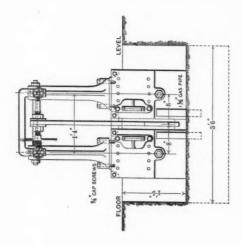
, 2 and 3 show the form and dimensions of the machine used in the experiments. Plates XXVI is from a photograph which shows somewhat imperfectly the general appearance of the apparatus. The hammer used weighed 103 lbs. The fixed knife-edges were designed so as to allow the broken bar to swing out of the way of the moving hammer, and were secured in a manner which allowed them to be adjusted for spans of 8, 12, 16, 20 and 24 ins. The heavy anvil plates behind them were bolted to a large anvil block of concrete which was sunk in the earth. Adjustable supports were provided to hold the test bar in position. The pivot blocks which support the hammer shaft are adjustable to allow for test bars of different depths. Attached to the hammer shaft is a registering device on which the swing of the hammer is read. The pivot blocks, etc., are supported by a strong wooden frame. Attachments are provided for raising and releasing the hammer. The plans for this machine were made in May, 1896. In making the design, the author was assisted by Mr. William F. Schaefer and Mr. Vernon Baker.
